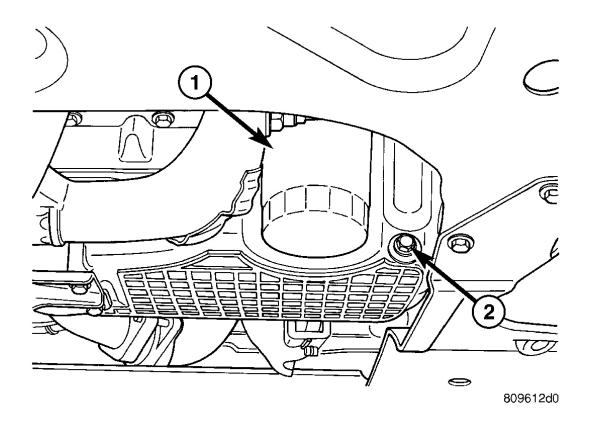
View Of Engine Oil Filter Courtesy of CHRYSLER LLC
